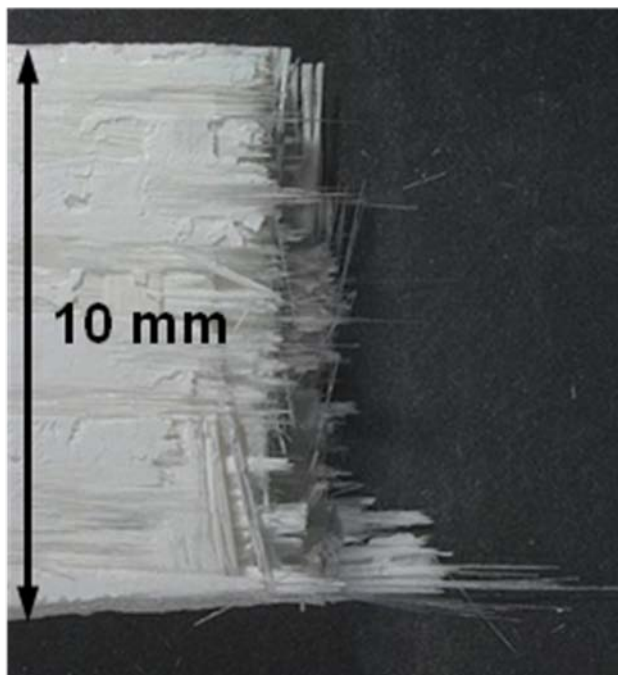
Fracture surface of the N720/AM specimen(2) tested in tension to failure with constant loading rate of 0.0025MPa at 1100°C in steam.
